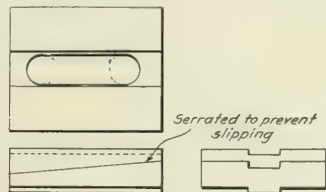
Adjusting Wedge for Elevating Center Chuck Block in Milling Wedges.
